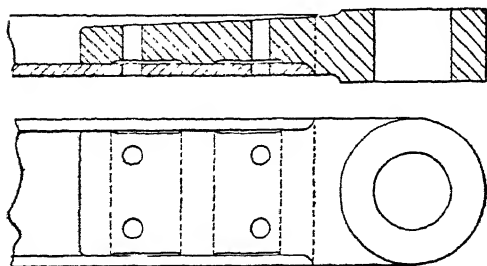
SIMPLE EXAMPLE OF FITTING CASTING TO CHANNEL SECTION BY FACING-STRIP CONTACT
